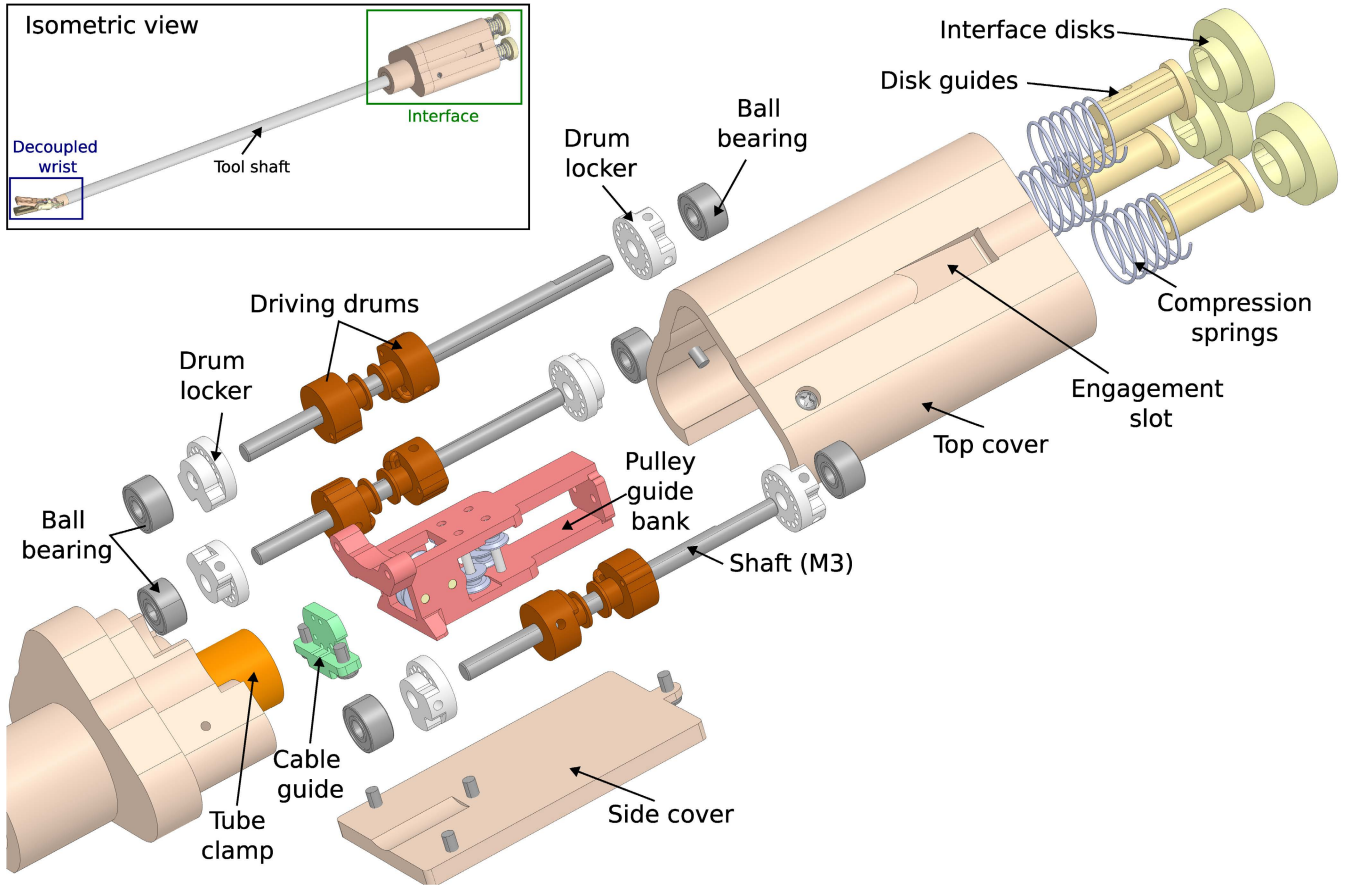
Exploded view of the OpenRST interface module. The tool shaft works as a link connecting the interface module with the decoupled wrist end-effector.
